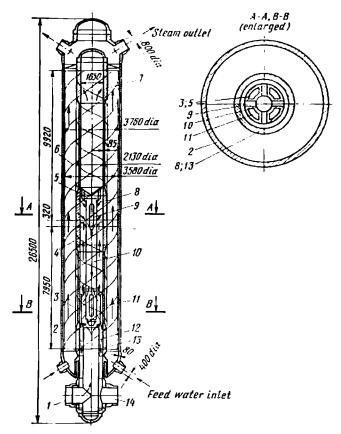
Once-through steam generator for 500 MW 1-coolant in; 2-housing; 3-lower water distributor; 4-beader; 3-upper water distributor; 6-tube bank (heating surface); 7-upper tube plate; 8-middle tube plate; 9-vertical slite; 10-insert; 11-sector channels; 12-shaft; 13-lower tube plate; 14-coolant out
